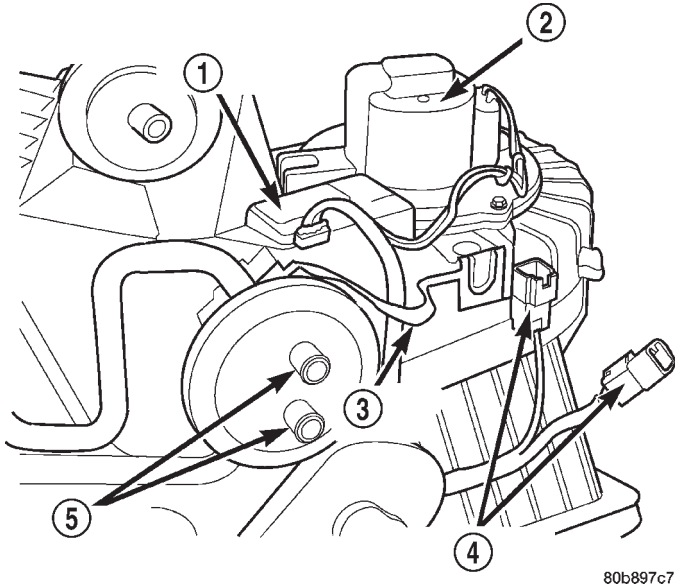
BLOWER MOTOR CONTROLLER REMOVE/INSTALL
